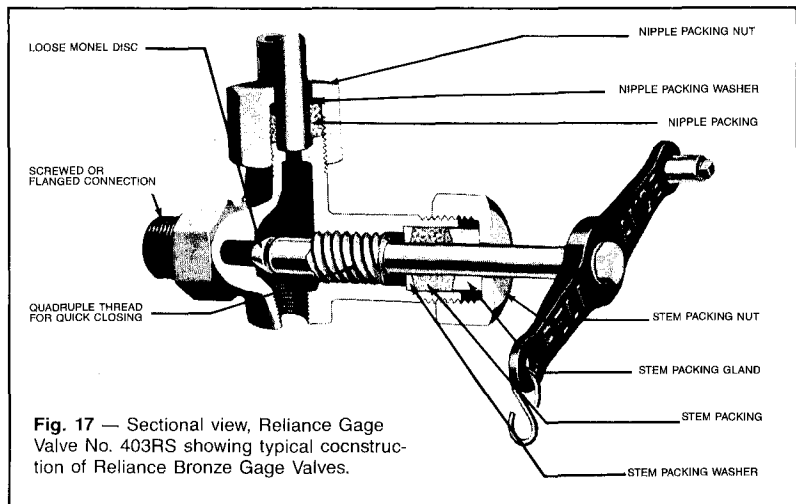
Sectional view, Reliance Gage Valve No. 403RS showing typical construction of Reliance Bronze Gage Valves.
